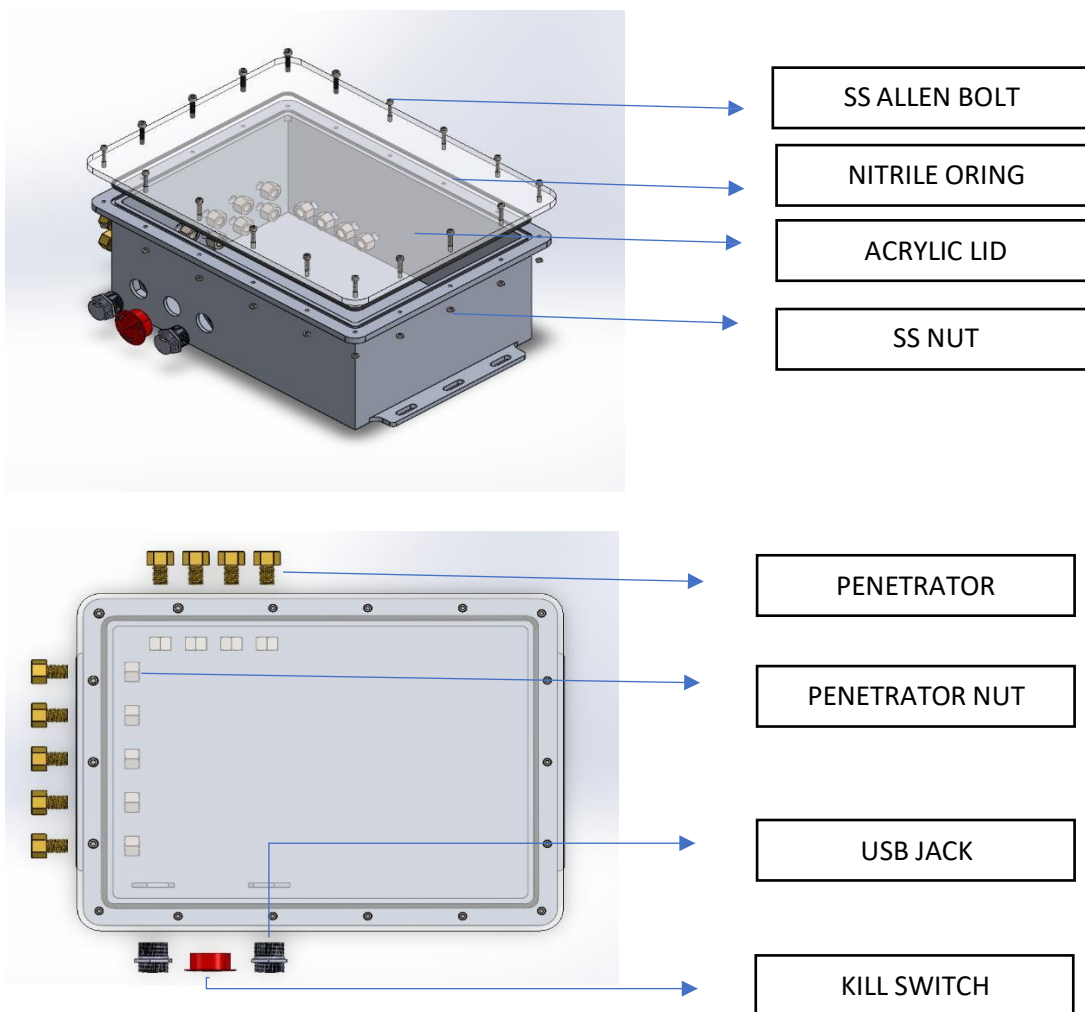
EXPLODED VIEW OF THE HULL
